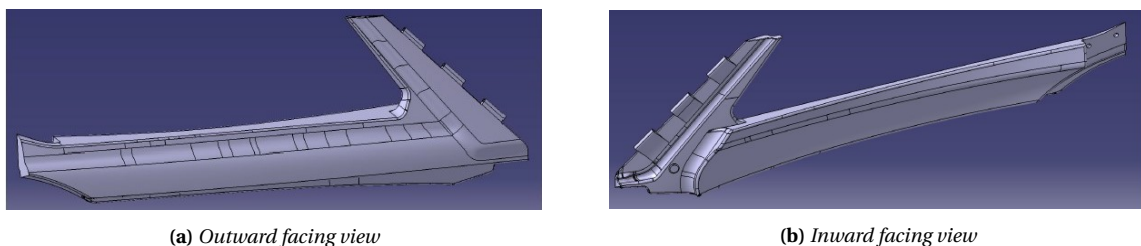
CAD drawings of the door beam (passenger side) of the Donkervoort D8 GTO [57]
